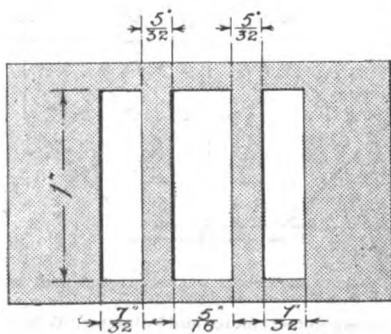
PORTS AS THEY WILL ACTUALLY FINISH.
